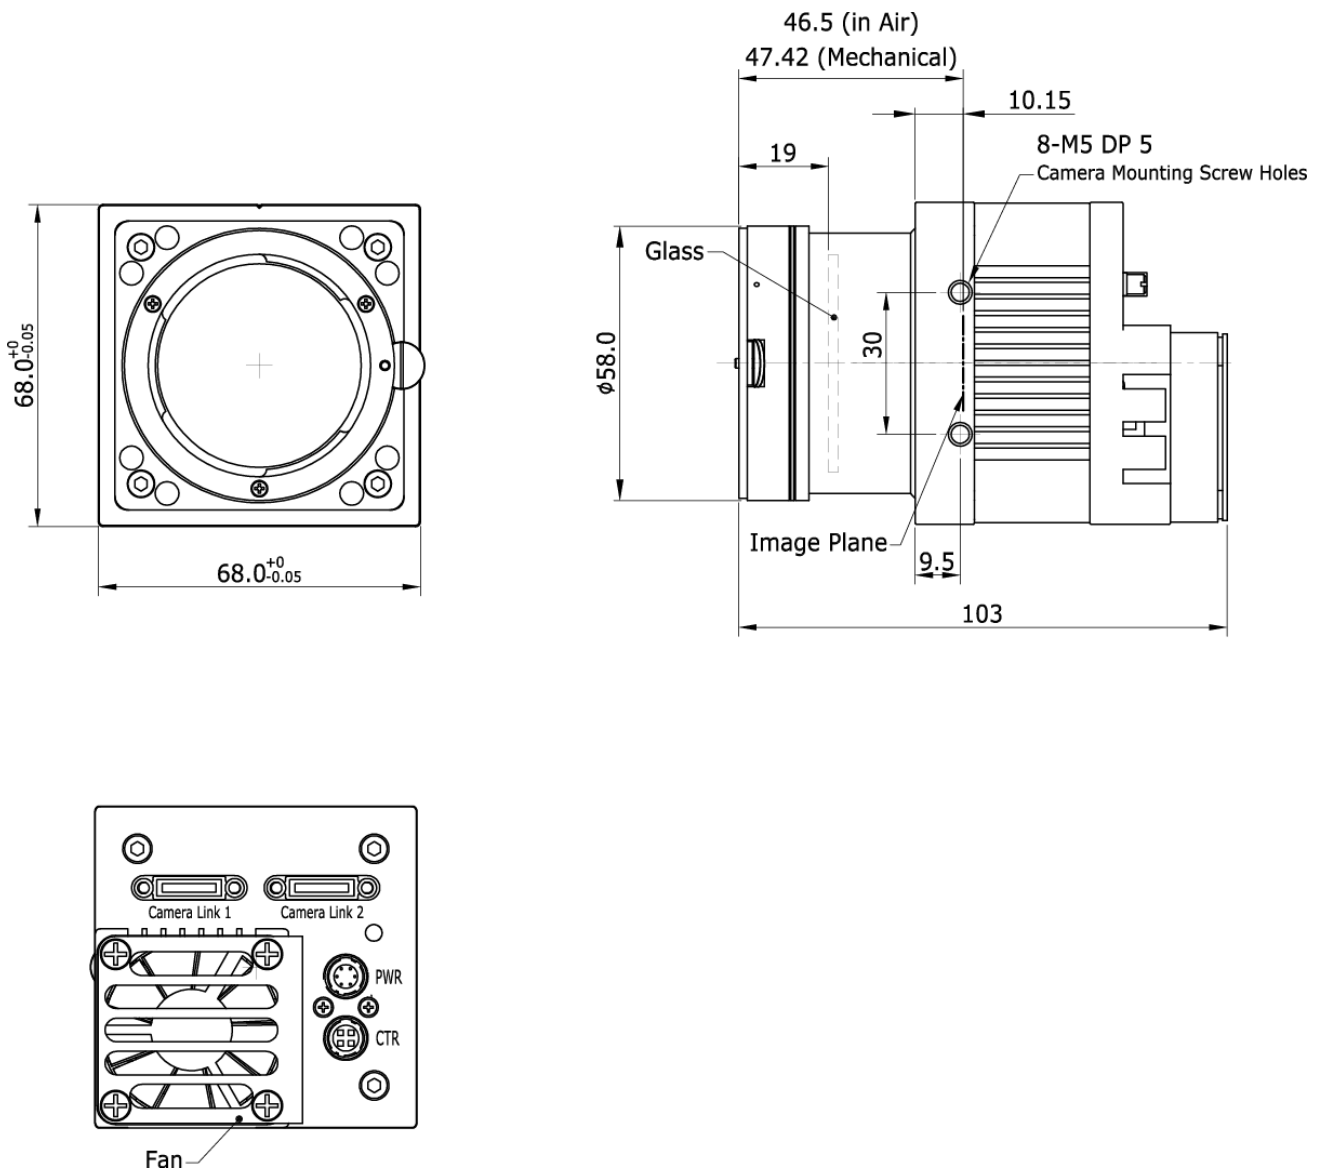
VC-71MC Camera Link F-mount Mechanical Dimension
